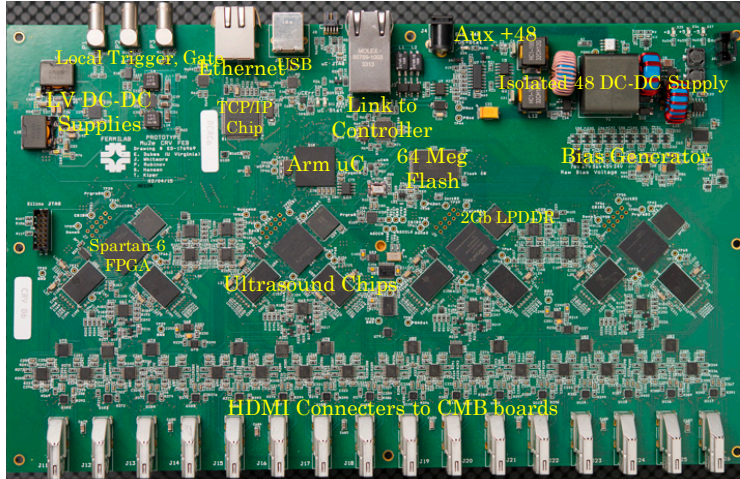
The Mu2e front end board. Courtesy of S. Hansen.
